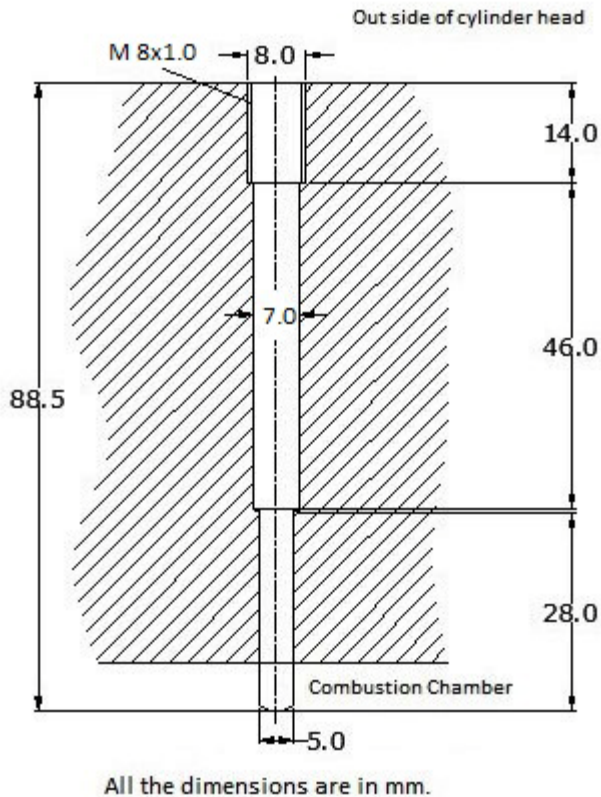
Internal geometry and specifications of the passes where adaptor fitted pressure sensor will be mounted on engine cylinder head.
